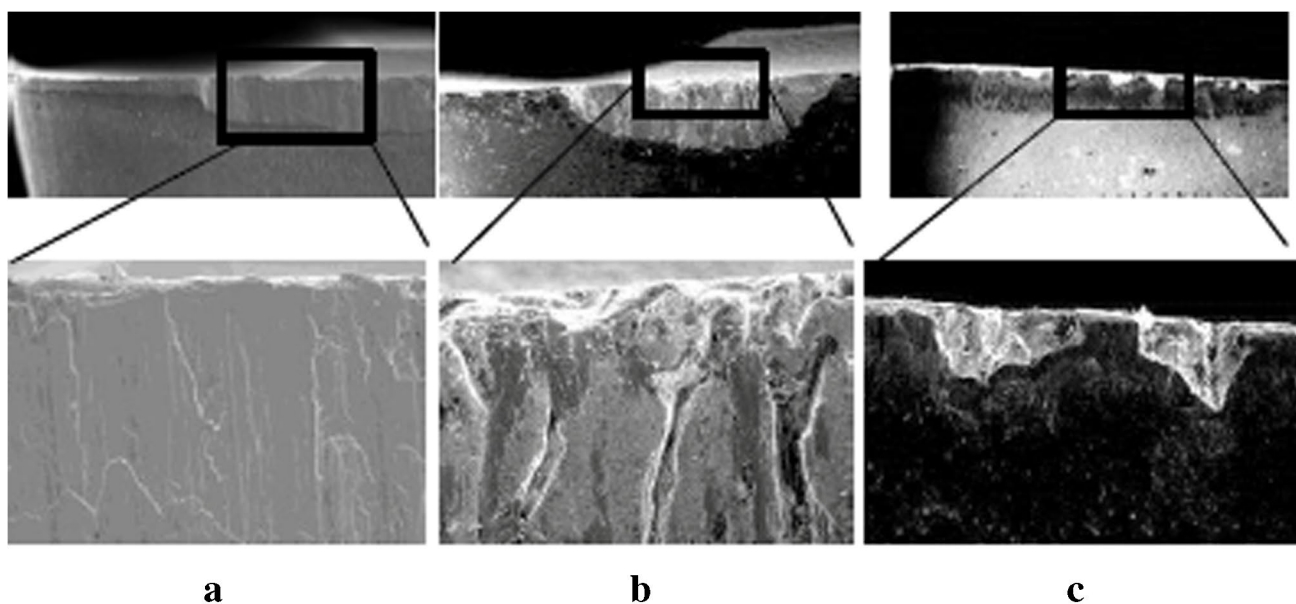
Tool wear analysis on flank face of cutting inserts under a dry milling compared to wet milling in b and c [23]
